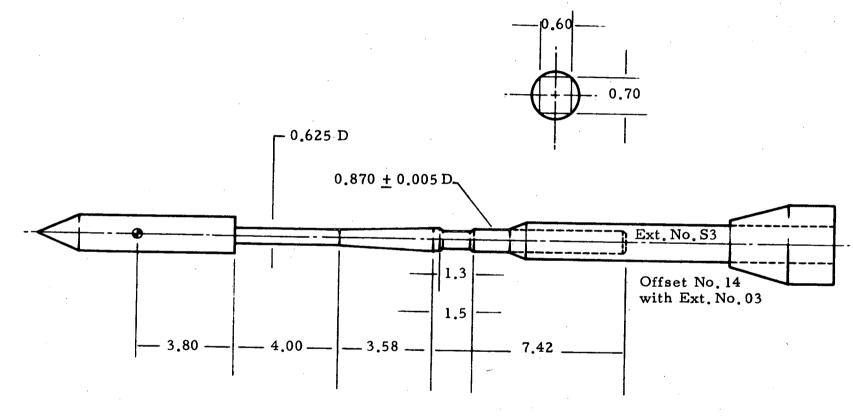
Sting Support for HO Tank - SRM Pressure Test
